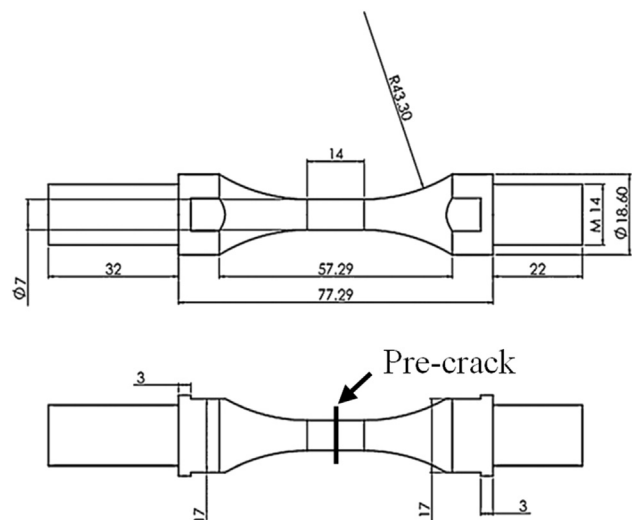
Schematic layout of the corrosion fatigue testing specimen (mm).
